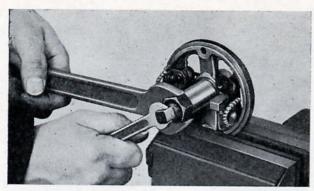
Withdrawing the installer pilot after installing the bush in the commutator end bracket
